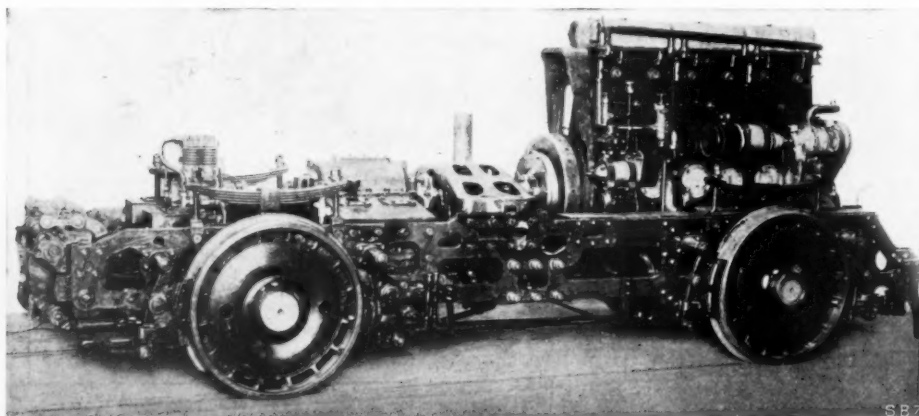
Assembly of 185 b.h.p. diesel engine and mechanical transmission fitted with SLM-Winterthur oil-operated clutches
